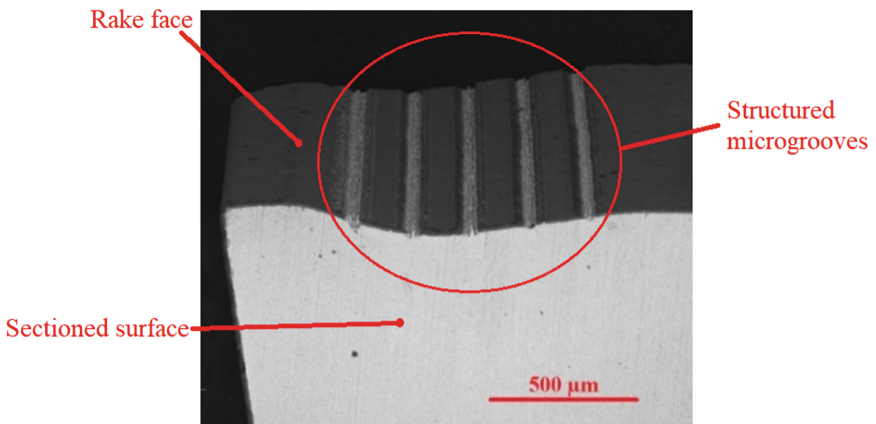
SEM image of sectional view for a sample structured tool used for the orthogonal cutting tests.
